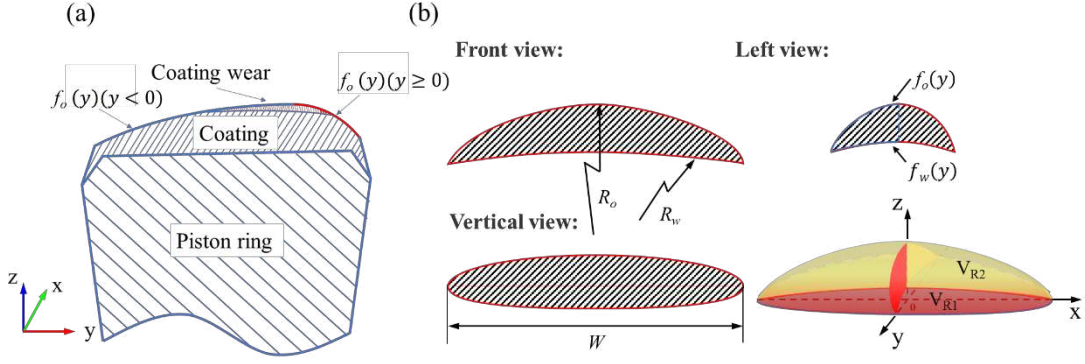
Wear shape and three views of piston ring coating: (a) wear cross-section morphology of piston ring coating, (b) wear shape and three views of piston ring.
